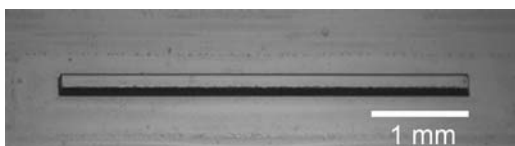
A mould for microchannel machined into PMMA using a micromilling machine.
